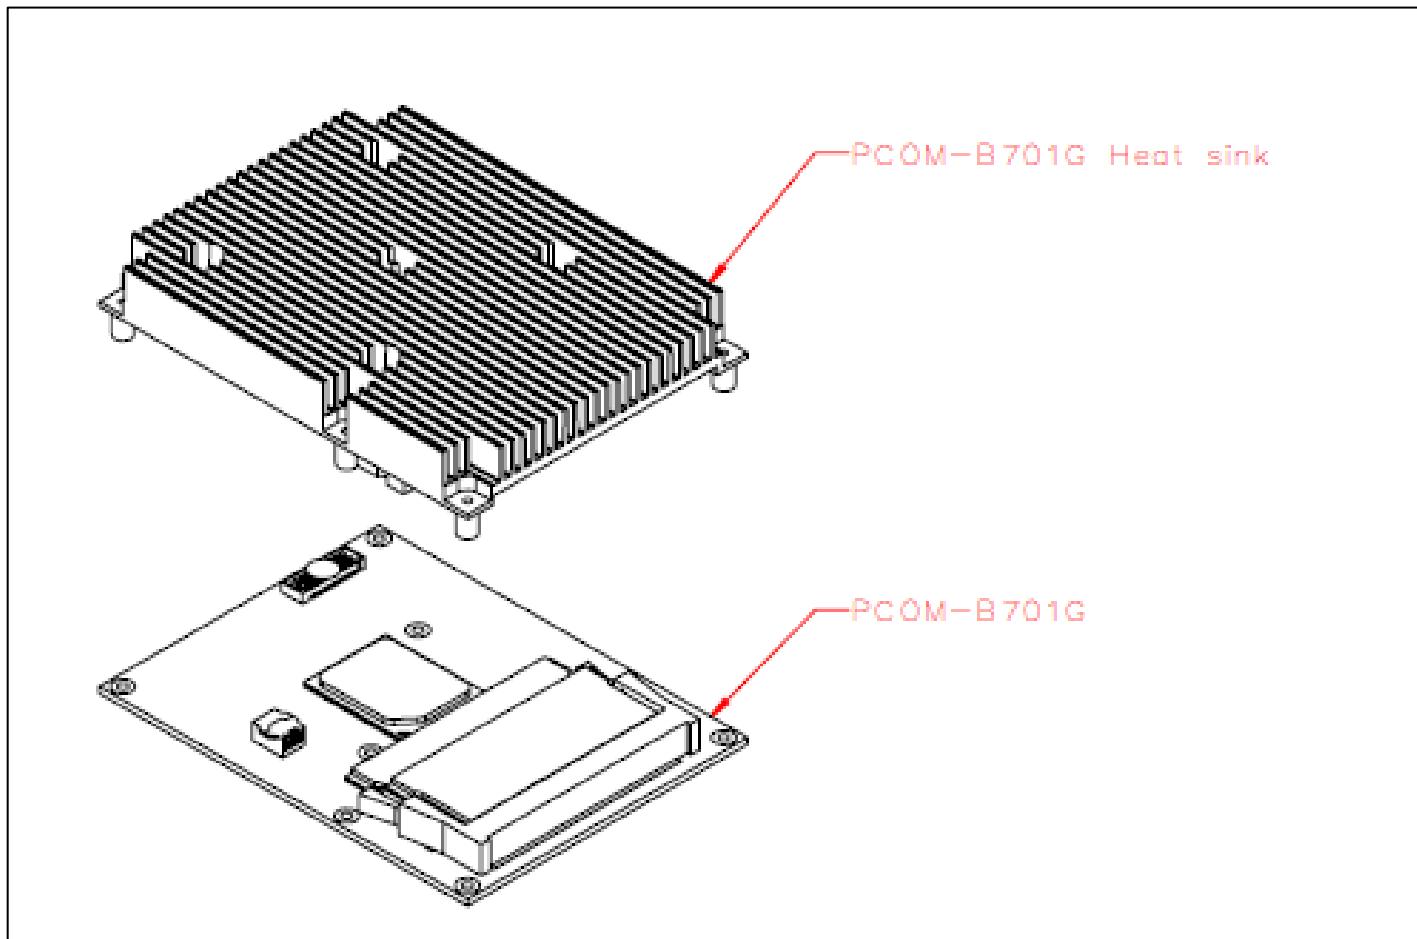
PCOM-B701GT Heat Sink Assembly Guide
